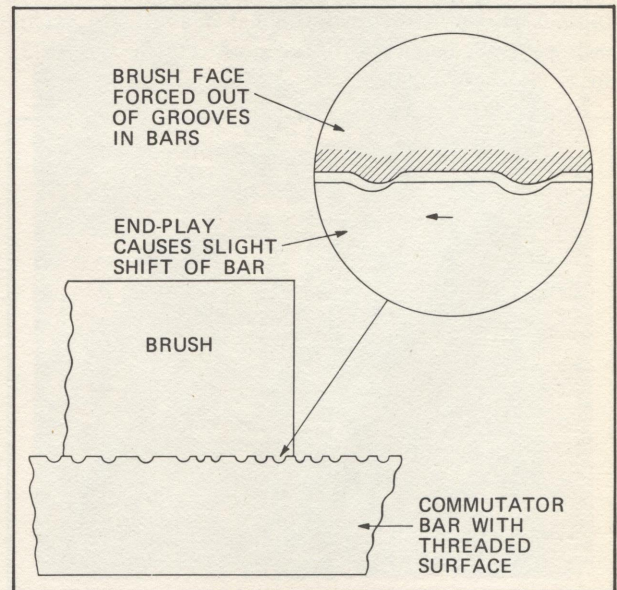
ILLUSTRATION OF THREADING OF COMMUTATOR SURFACE.
